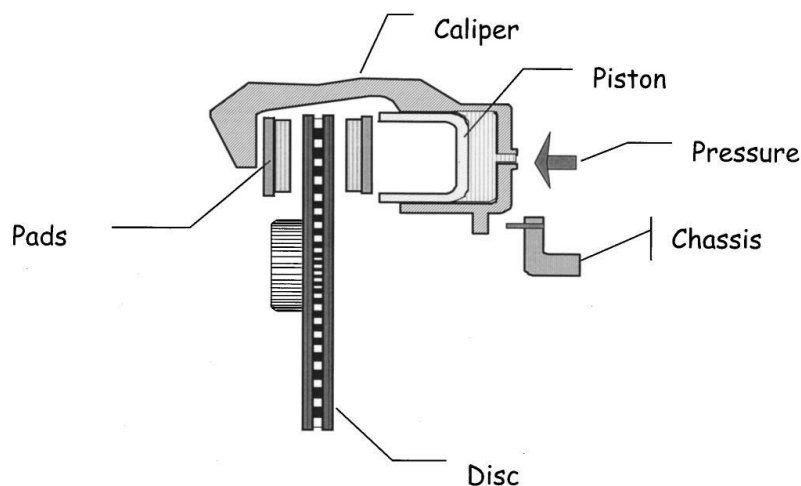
Disc and pad brake assembly with a single-piston and a ventilated disc [2]
